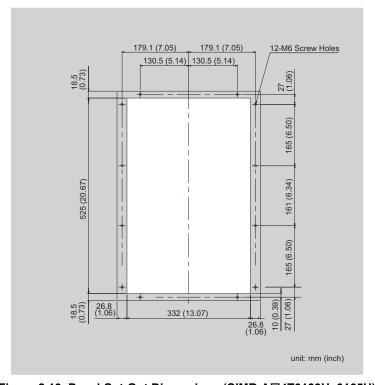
Panel Cut-Out Dimensions (CIMR-A□4T0139U, 0165U)
